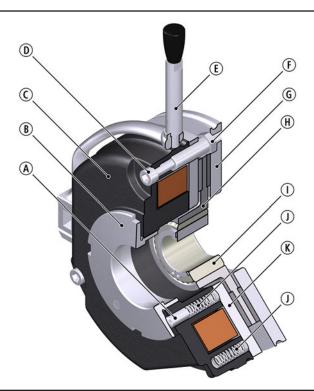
Design of the INTORQ BFK458 spring-applied brake: Basic module E (complete stator) + rotor + hub + flange
